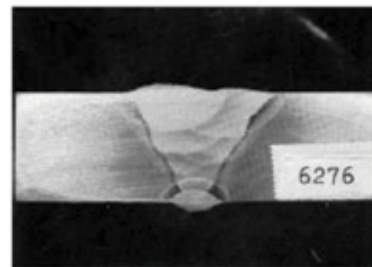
Macroscopic specimen of multi-pass weld
